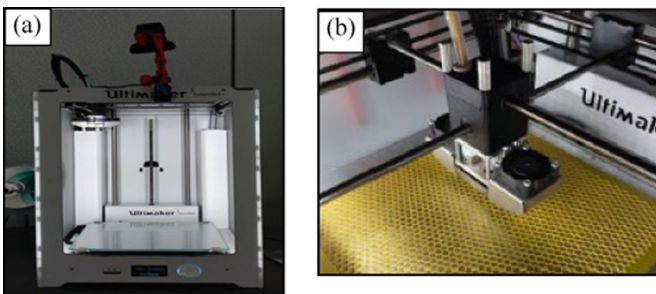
(a) Ultimaker 3D printer; (b) Printed honeycomb core using PLA.
